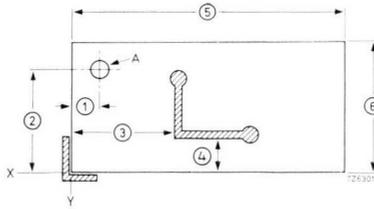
Reference dimensions for rectangular PCB with no cut-outs.
